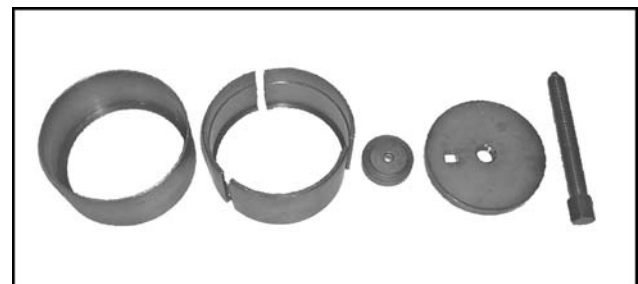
Crankshaft Rear Wear Sleeve Remover, ZTSE4518
